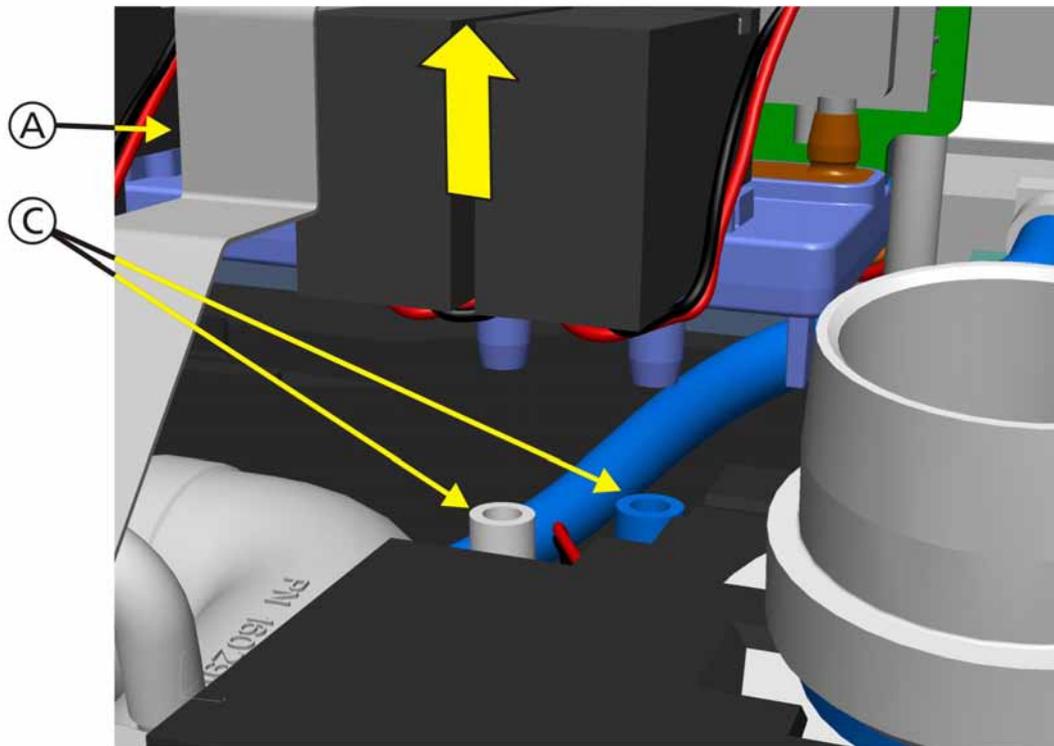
Pressure Sensor Assembly Removal, Step 2
